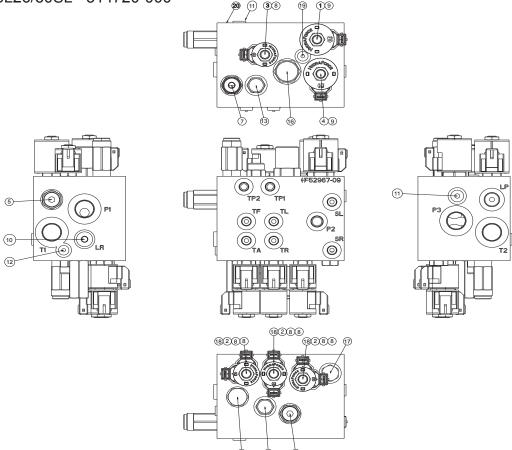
Hydraulic valve block movement of SL26/30SL
